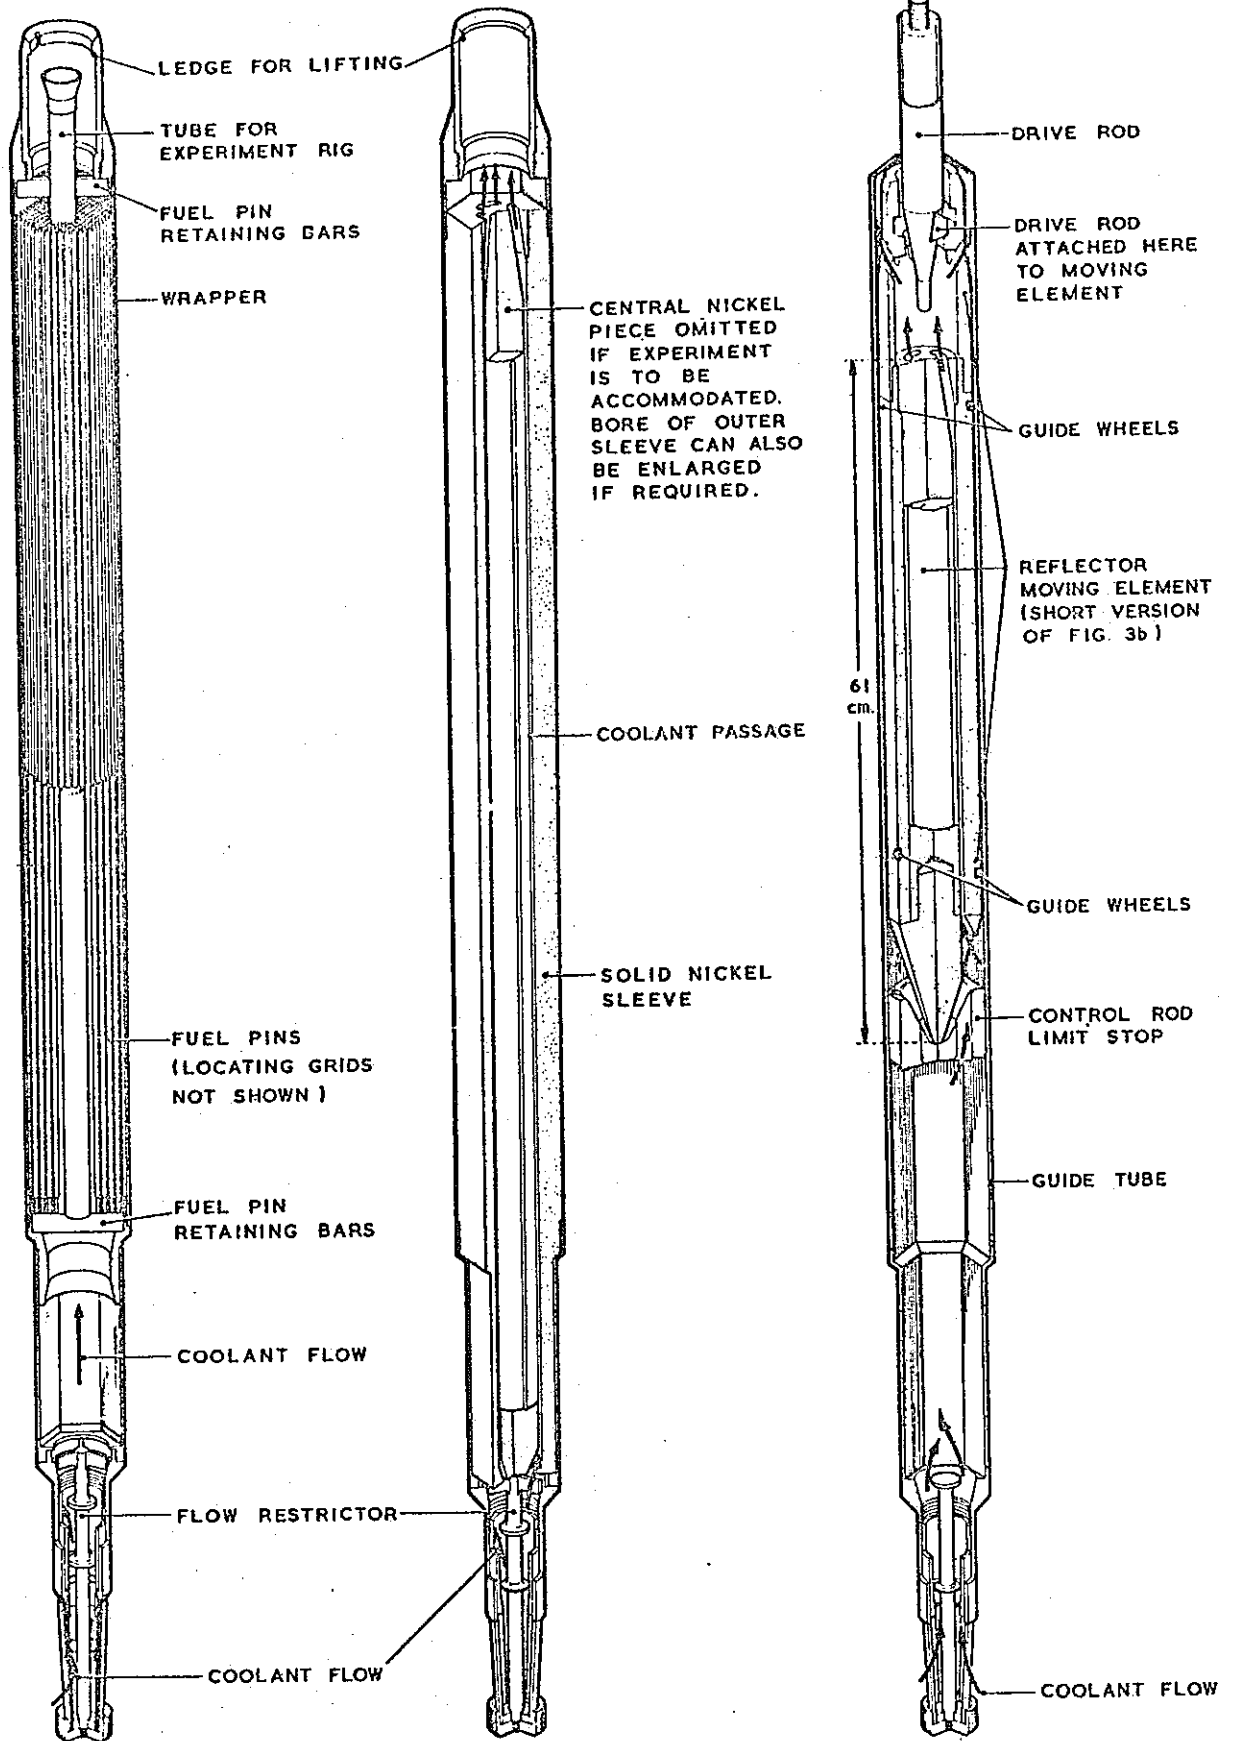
M.F.R. FUEL SUB-ASSEMBLY.
